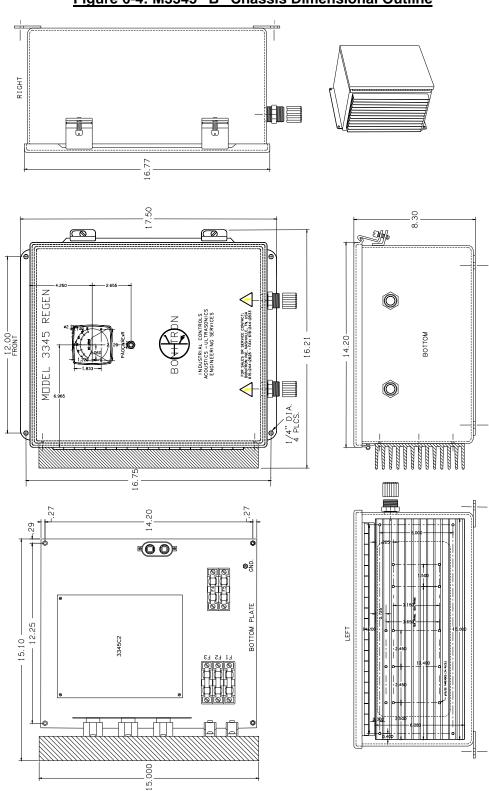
M3345 "B" Chassis Dimensional Outline
